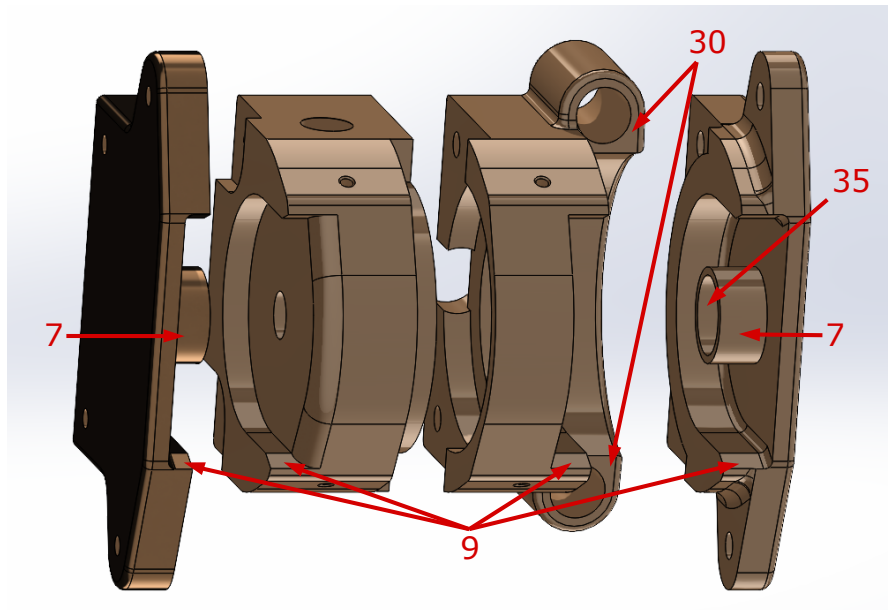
Exploded view of the upper structure from below. (7) Upper structure shafts, (9) ROM mechanical stops, (30) Rope mechanical stops, (35) Hole for sun bearing.
